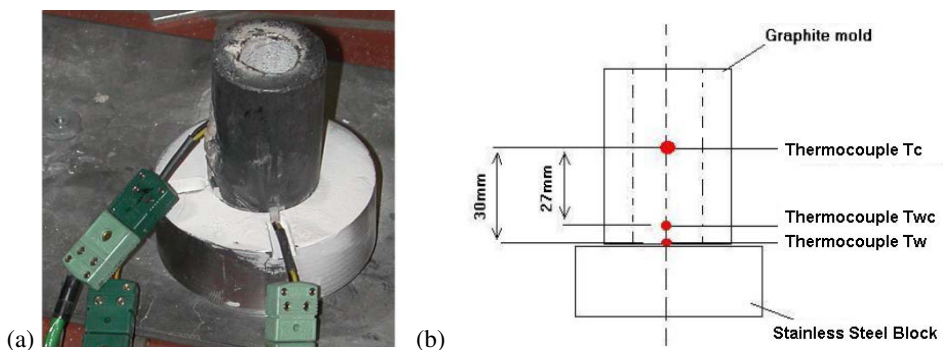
Experimental equipment (a) photograph and (b) schematic, showing graphite mold, stainless steel block, and thermocouple locations.
